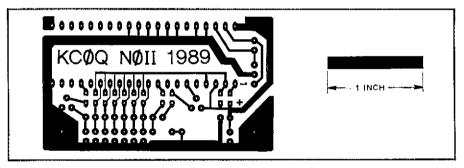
Circuit-board etching pattern for the CMOS Super Keyer II. The pattern is shown full-size from the foil side of the board. Black areas represent unetched copper foil. Ready-made PC boards are available; see note 2.
